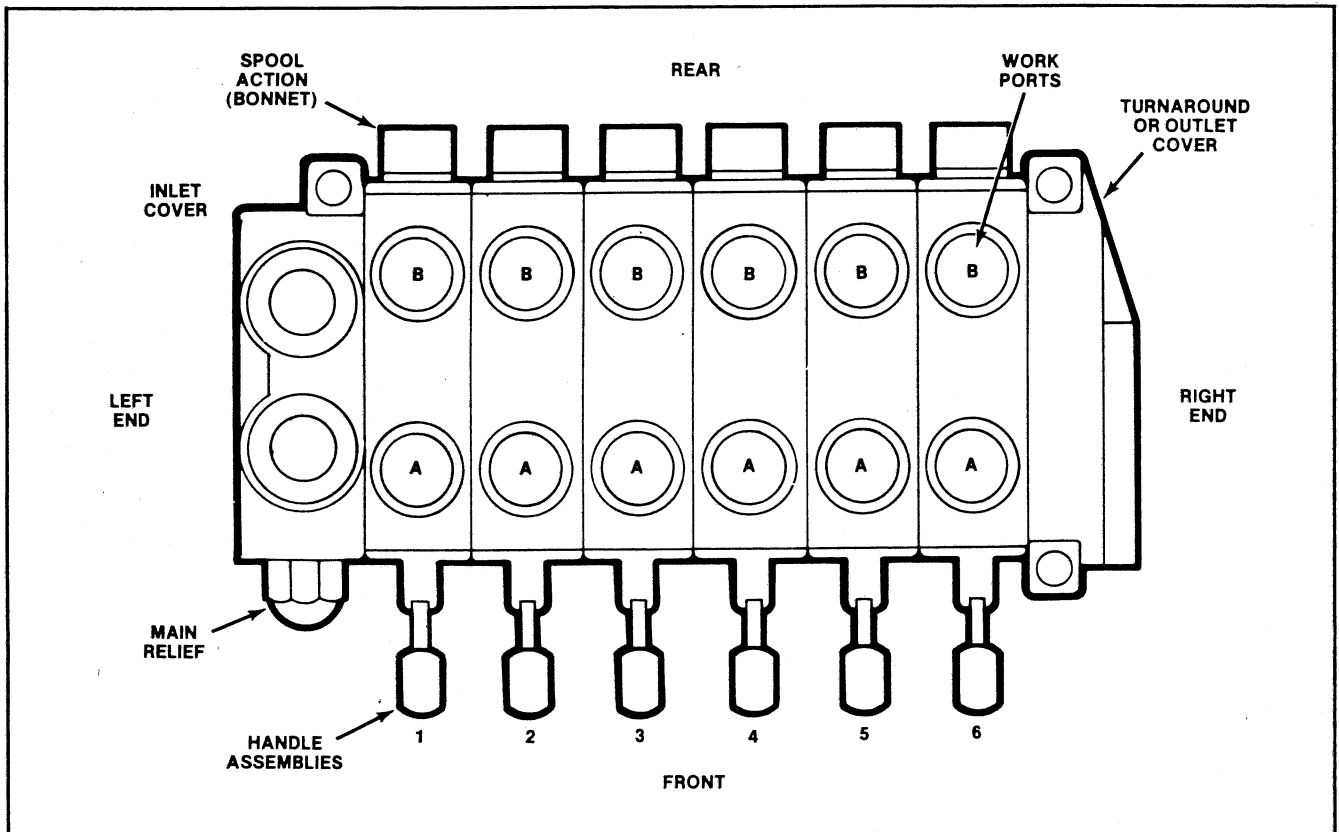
Schematic-View of Typical Control Valve Assembly.
